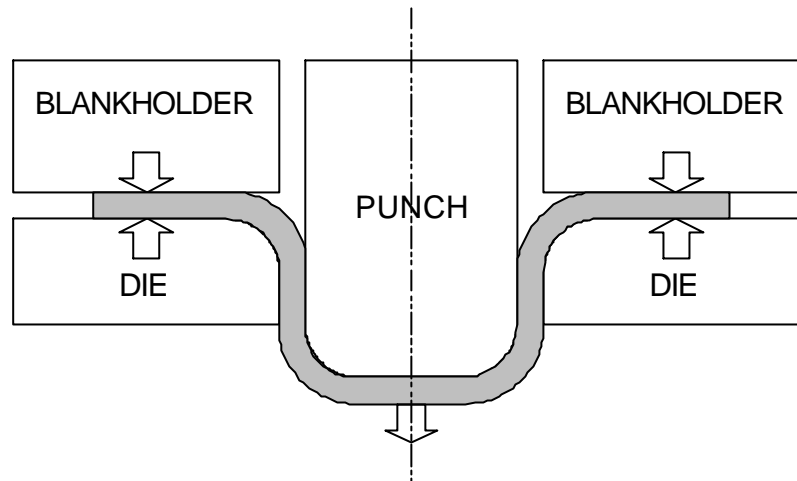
Schematic representation of the deep drawing operation, for a cylindrical tool. The area between the blankholder and the die is called the blankholder area, the material between the blankholder and the die is called the flange. The material being formed is clamped between the blankholder and the die by a clamping force (the blankholder force) and is pulled out of the blankholder area by movement of the punch (in the picture: downwards). In a stretching operation the material is completely clamped in the blankholder, the construction of the tool is otherwise similar to that of a deep drawing tool.
